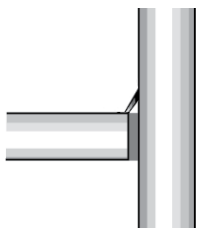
3/32 inch (2.5mm) gap after welding
